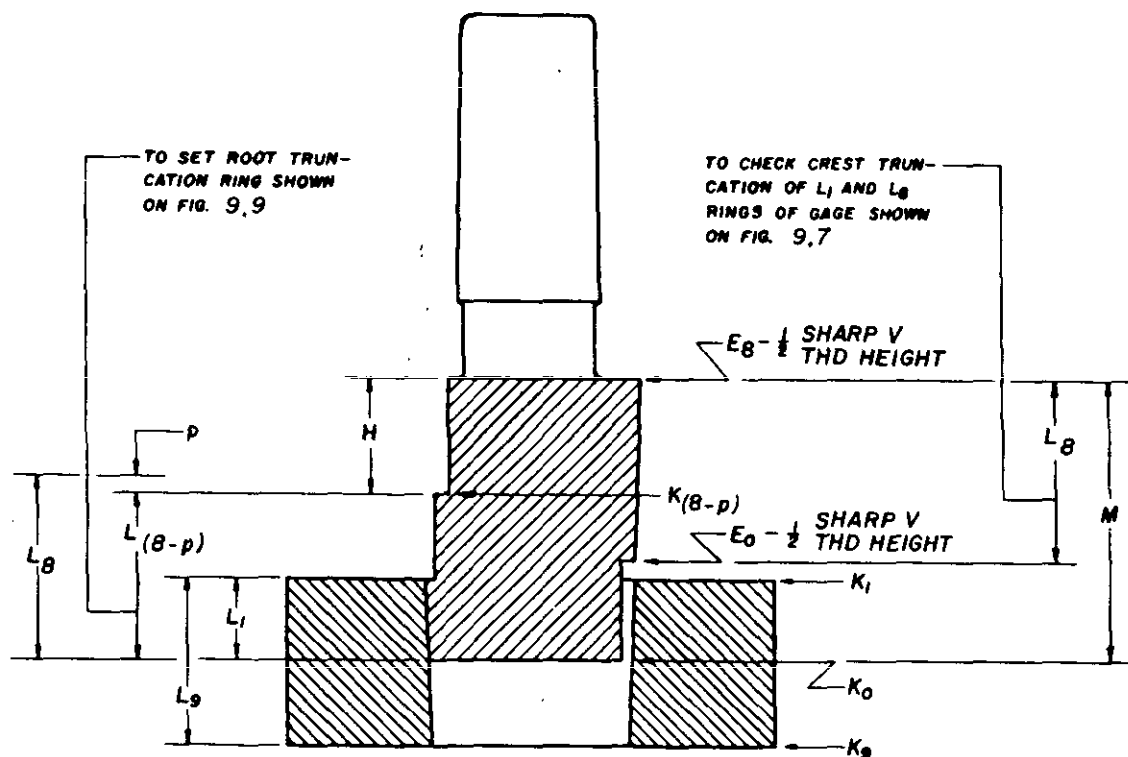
Master setting plug and ring gages for setting pitch diameters of threaded plug and ring gages for NGT, NGT(C1) and SGT.
